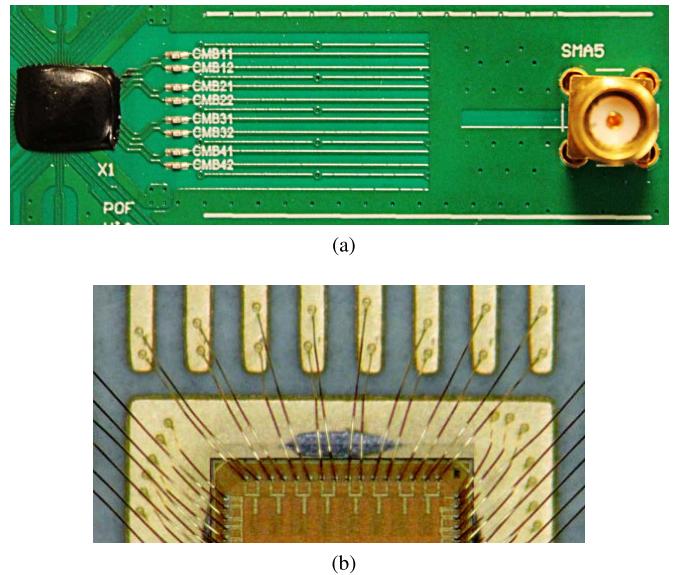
Photographs of (a) power combiner on PCB and (b) bonding wires connecting the PA to the combiner.
